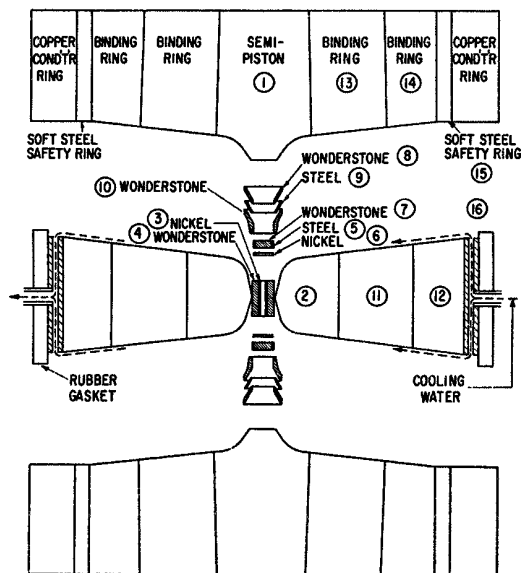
The "belt": high-temperature, high-pressure apparatus. "Exploded" assembly.
